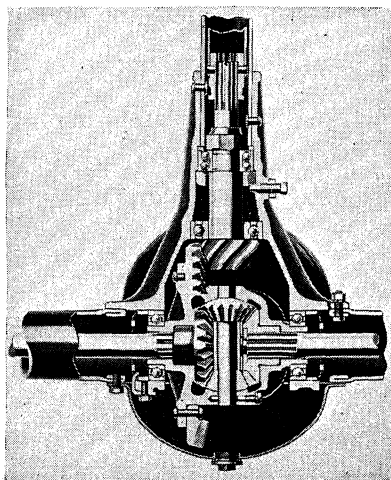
Straight- and spiral-tooth bevel gears in an automobile differential.
